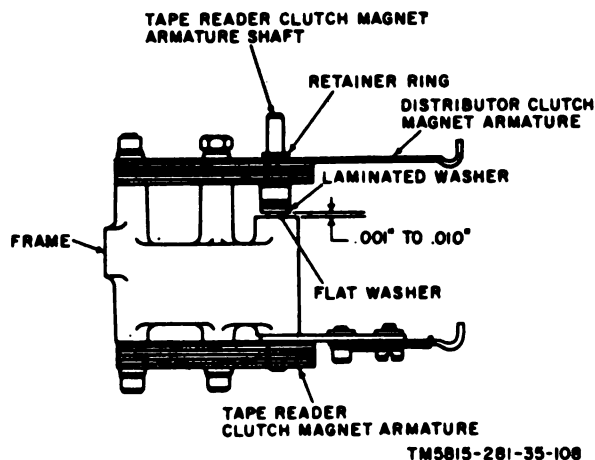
Tape-reader clutch magnet armature shaft end play requirement.
